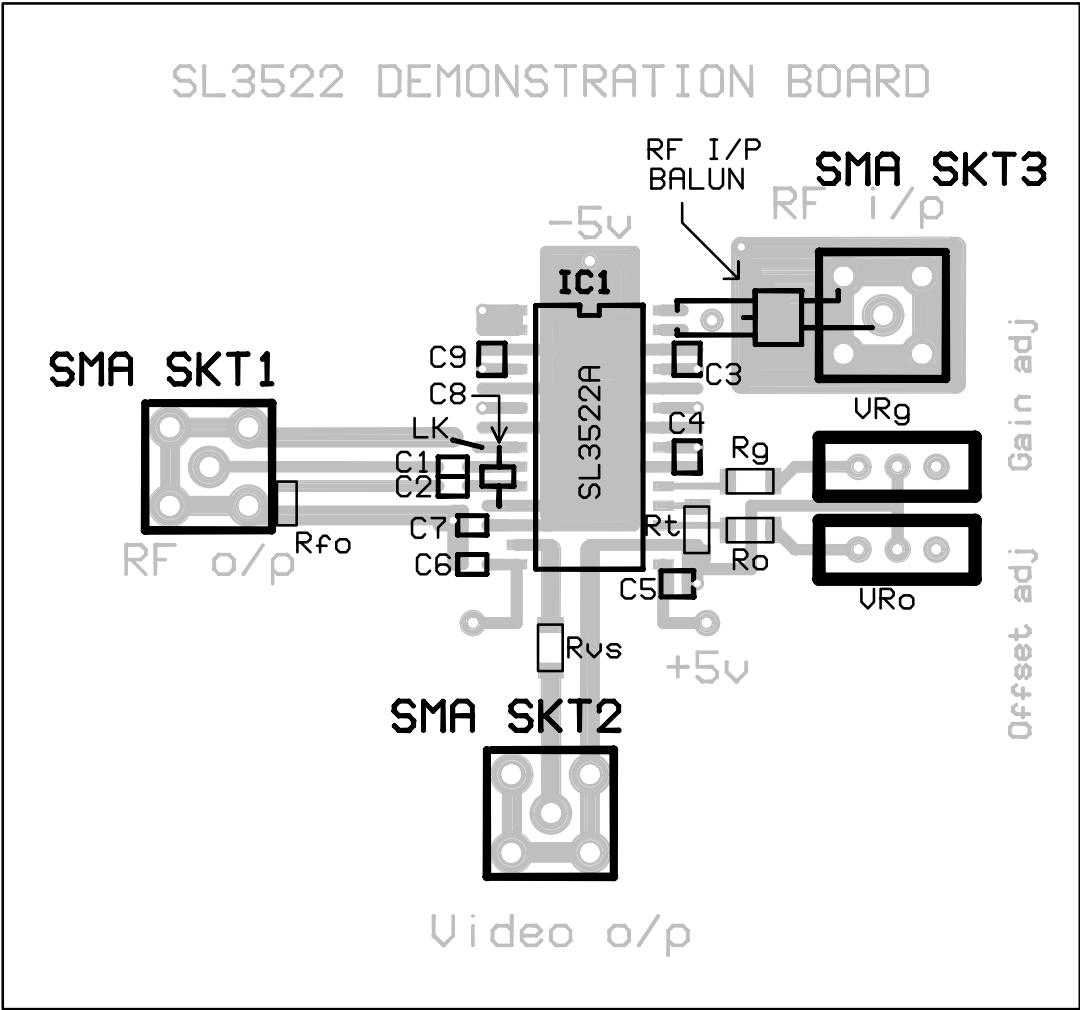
Demonstartion Circuit PCB showing components positions (2x full size) with top and bottom copper masks (full size)
